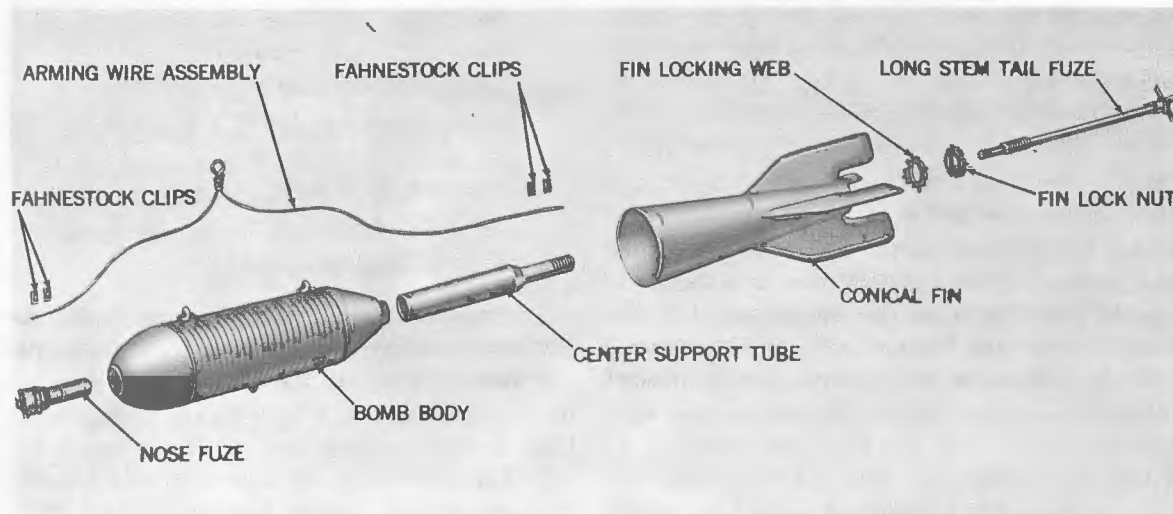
260-lb Frag Bomb AN-M81 with Fin Assembly M135, Exploded View.
